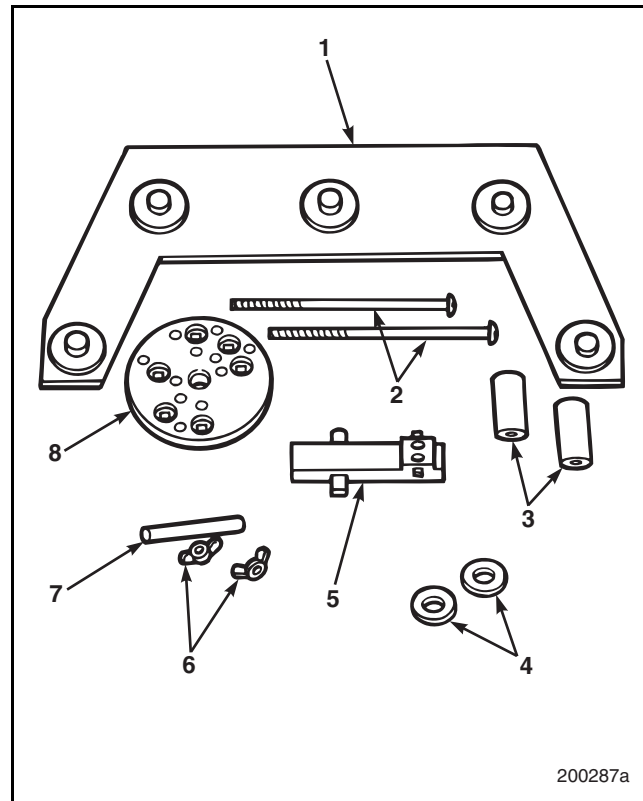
Fire Ring Groove Cutter J 29600-C
